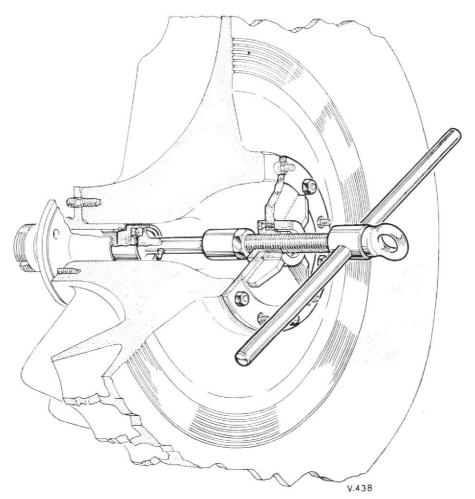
Assembly of pivot extractor T.78044 to the impeller.
